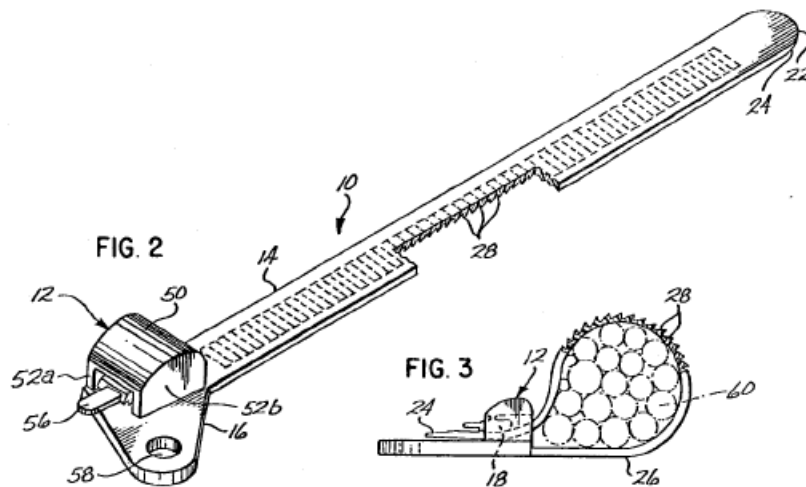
is a perspective view of the adjustable clamp disclosed in Botka. (Botka, col. 1, ll. 48-51.) Figure 3 is a side view of the adjustable clamp holding a bundle of wires. (*Id.* at col. 1, ll. 52-53.)
